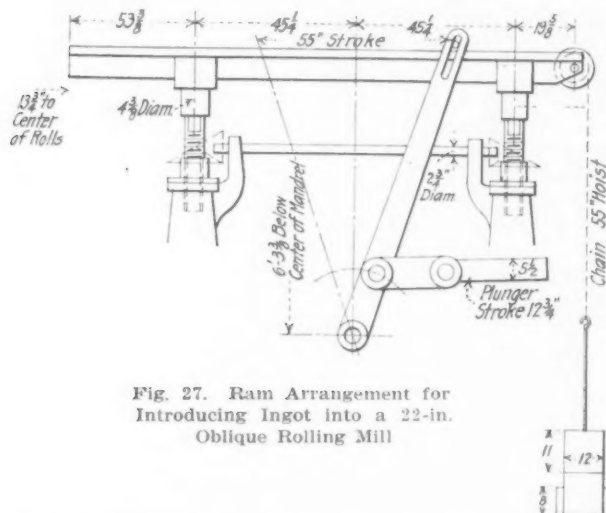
Ram Arrangement for Introducing Ingot into a 22-in. Oblique Rolling Mill
